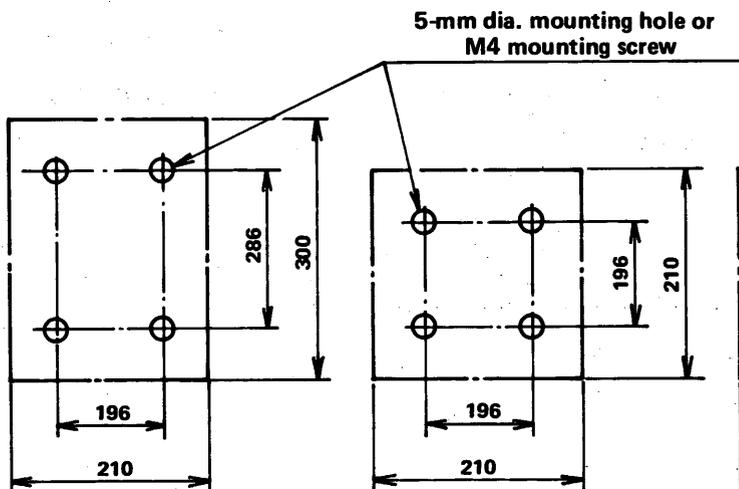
Mounting Dimensions of Basic Unit and E56
